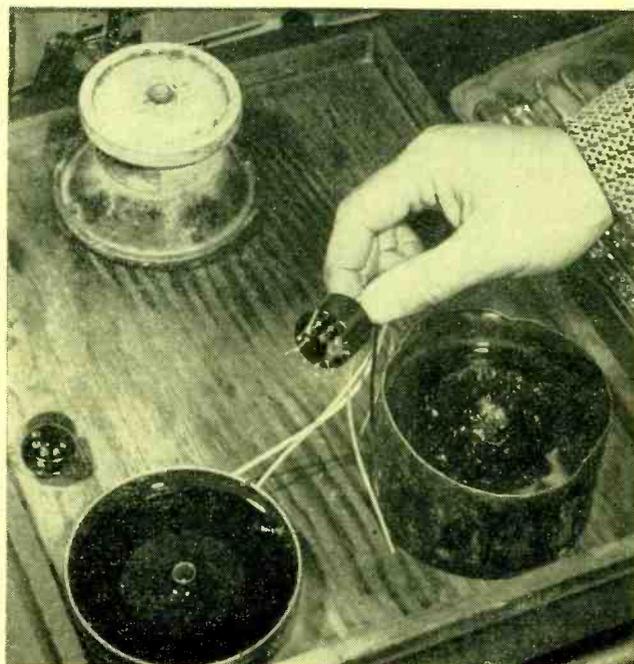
Soldering of leads to octal plug is performed by first fluxing connections then dipping part in soldering pot, rear
